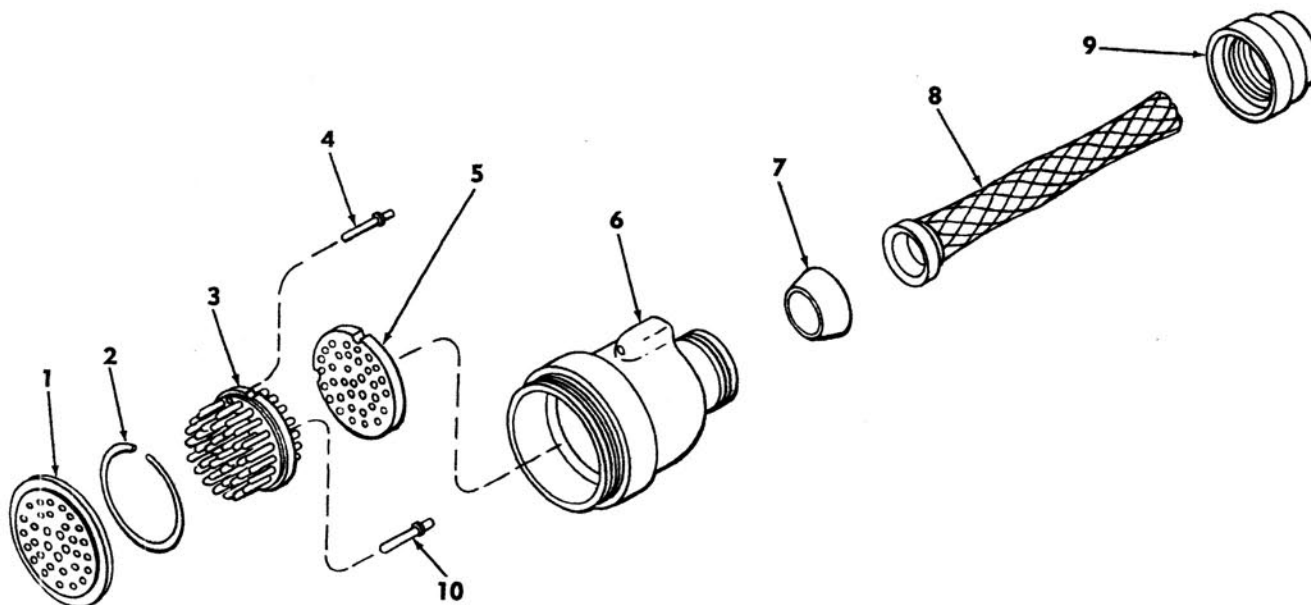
CABLE ASSEMBLY, POWER, ELECTRICAL /11067500 AND 11067544/
